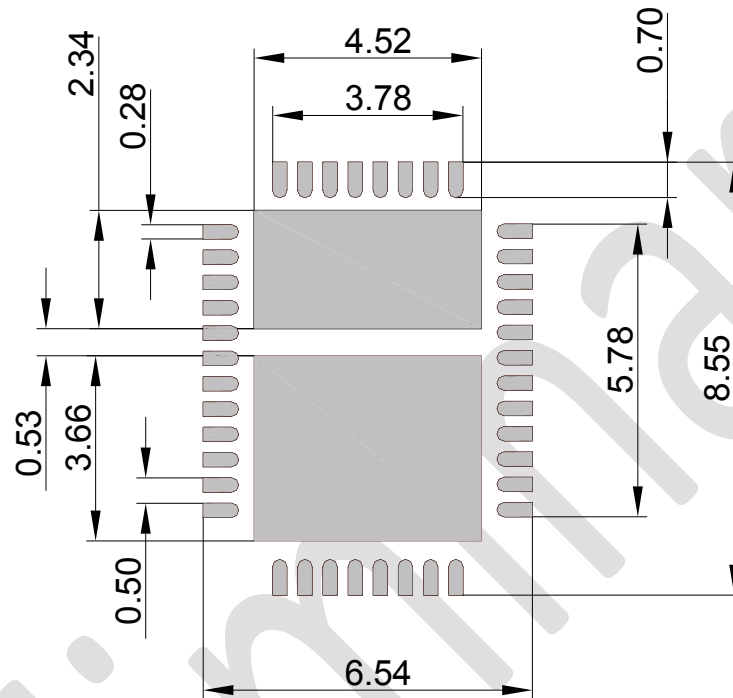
PD70222 Top layer Copper Recommended PCB Layout (mm)
